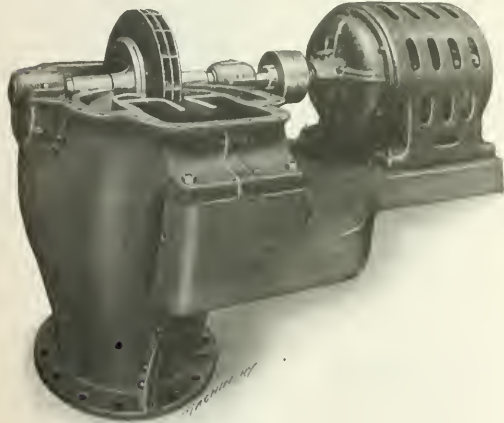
Turbo-blower shown in Fig. 1 with Casing removed
